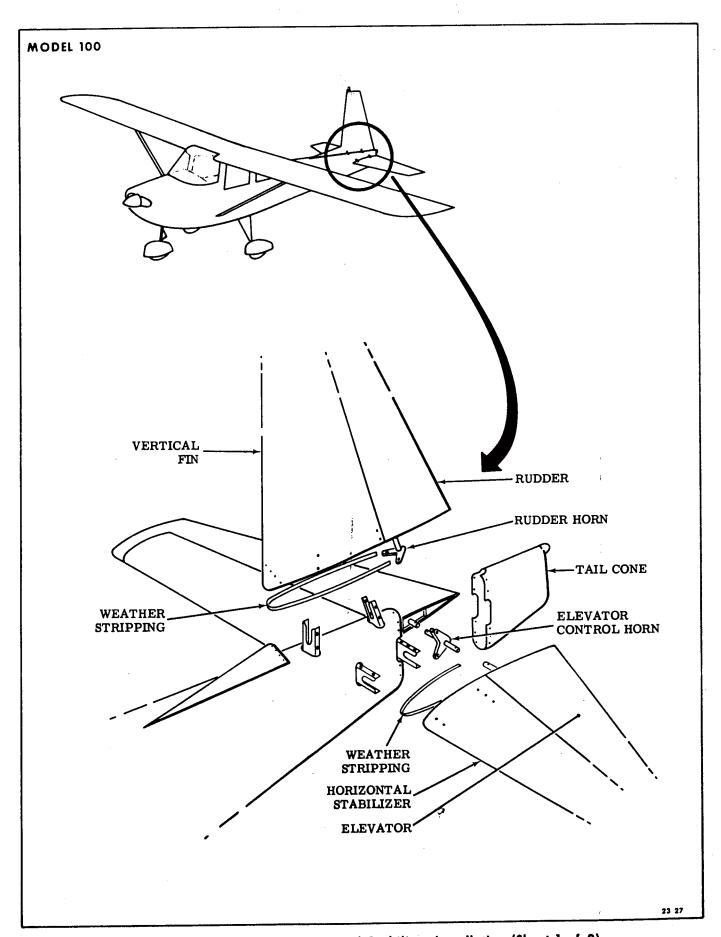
Vertical and Horizontal Stabilizer Installation (Sheet 1 of 2)
